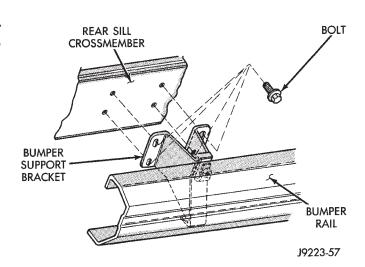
Rear Bumper Removal/Installation—XJ Vehicles
